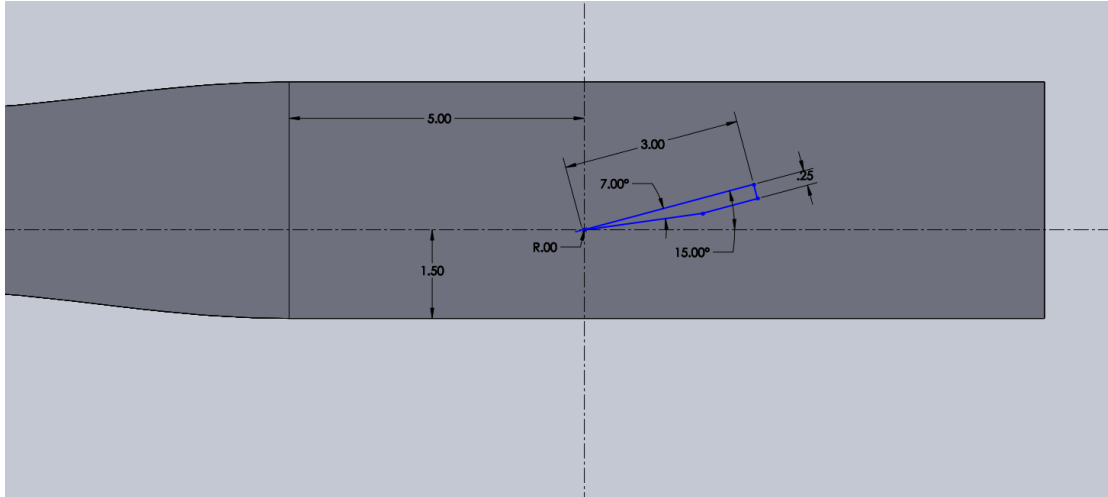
Engineering Drawing of the Fin in the Test Section
